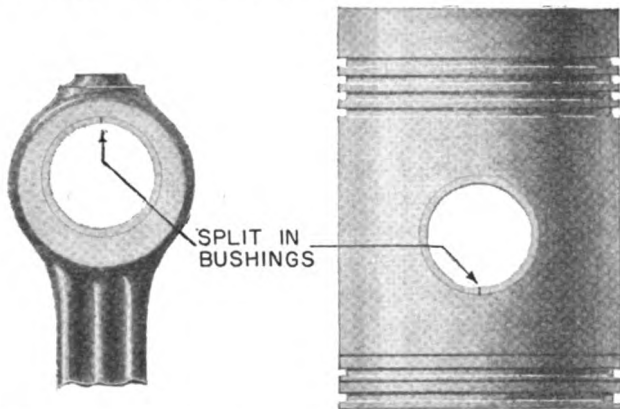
Location of joint in piston pin bushings for piston and connecting rod.
